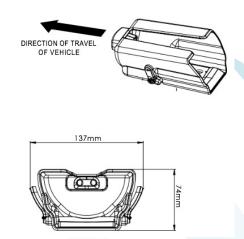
Holder may be mounted on either a horizontal or vertical panels. Mount using four M5 fixing screws
